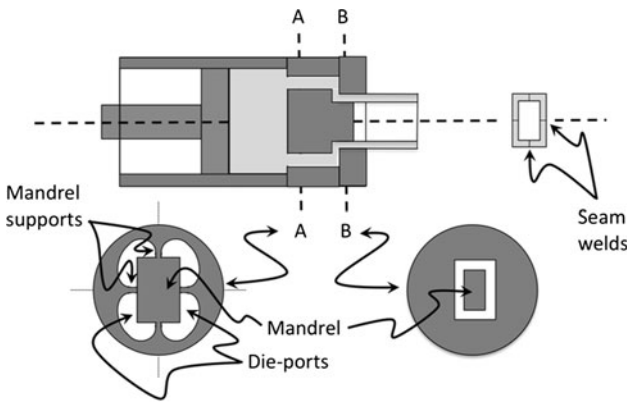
Schematic illustration showing formation of seam welds in a hollow rectangular extrusion as the billet flows around mandrel supports (section A)
